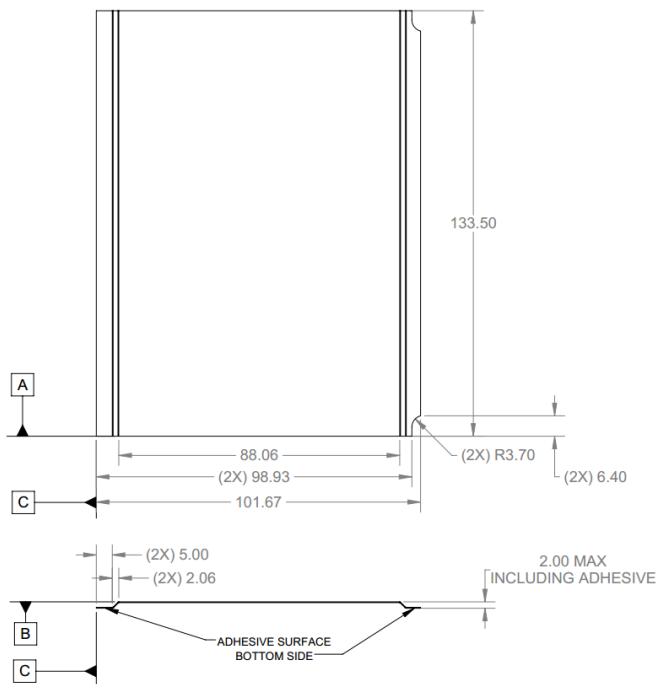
Large Card Bottom Side Insulator (Top and Side View)
